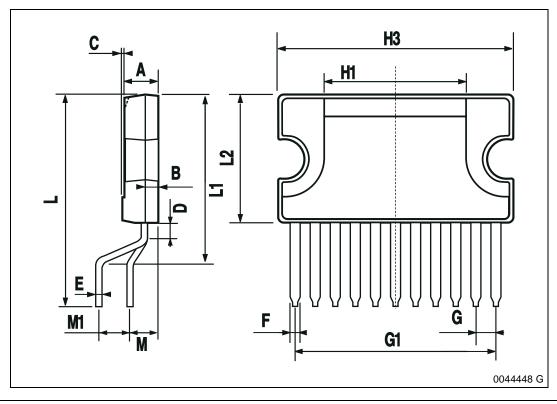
Clipwatt11 Mechanical Data & Package Dimensions
